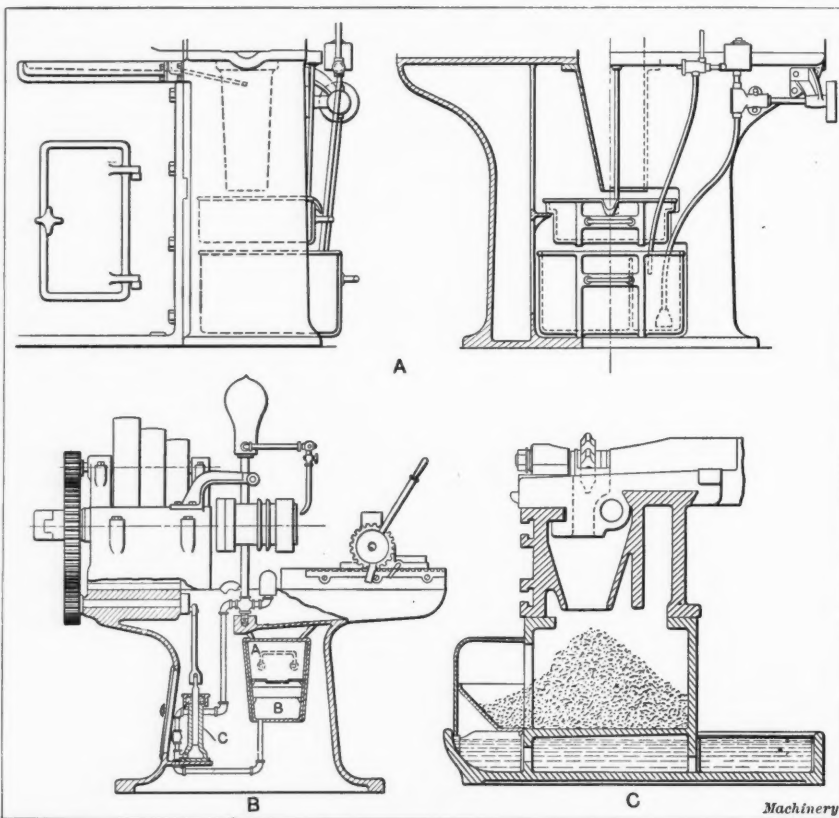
A, Drainage Tank placed above Main Supply Tank; B, Common Lubricating Arrangement for Threading Machinery; C, Gear-cutting Machine with Provision for storing Oil in Base
